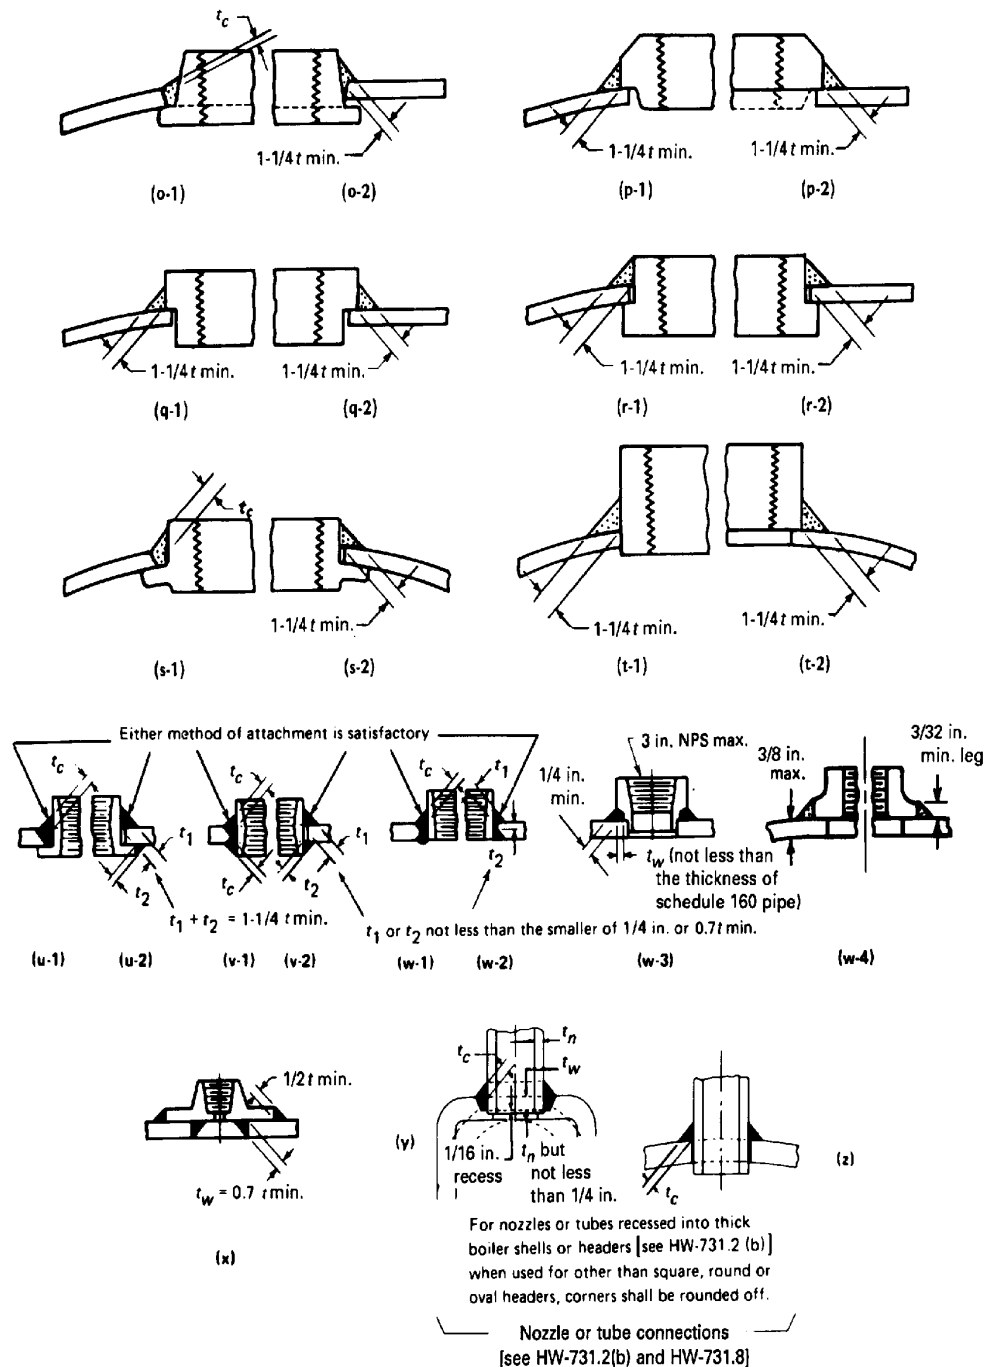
SOME ACCEPTABLE TYPES OF WELDS FOR FITTINGS, NOZZLES, AND OTHER CONNECTIONS TO SHELLS, DRUMS, AND HEADERS (CONT'D)
